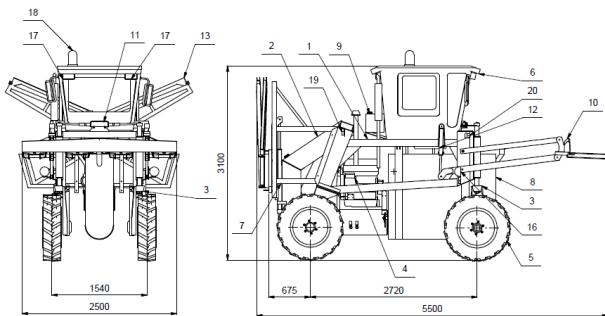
Basic components and dimensions of the machine Hidromatiks S-PST. 1 - main frame box, also used as hydraulic oil tank (2), 3 - wheel holder, 4 - drive unit, 5 - steering assembly, 6 - cabin, 9 - fuel tank, 11 - steering mechanism, 10 and 12 - working device for cutting operations, 8 - tank for pesticides, 13 - sprayer, 16, 17, 18, 19, 20 - light-signalling equipment
